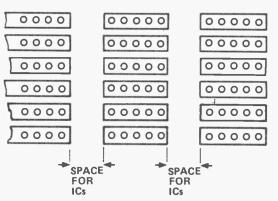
The track pattern of DIL-board. Using this type of board saves on cutting.
